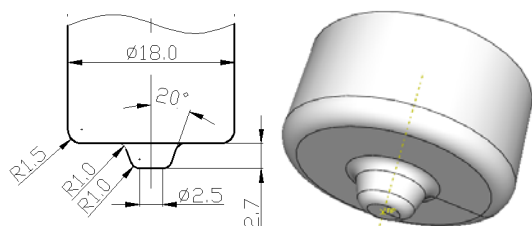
The welding tool used in the experiment and in the numerical analysis.
